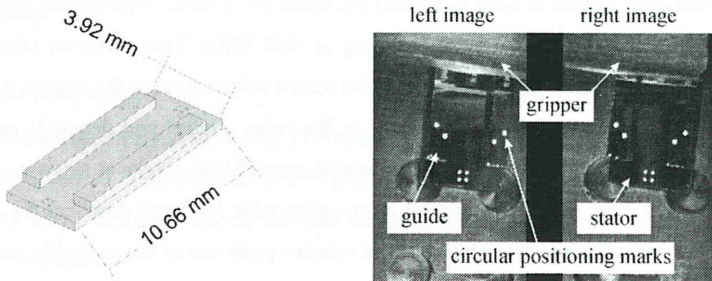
Assembly group guides on stator (left); view of 3D vision sensor (right)
